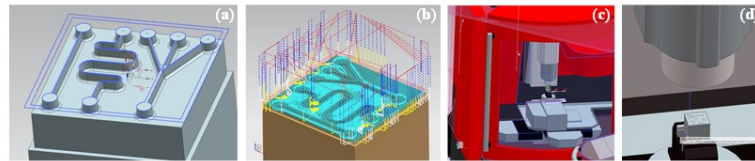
CAD/CAM processing: (a) CAD part with micro features; (b) CAM tool path generation; (c) kinematic model of KERN Evo; (d) Virtual machine simulation
